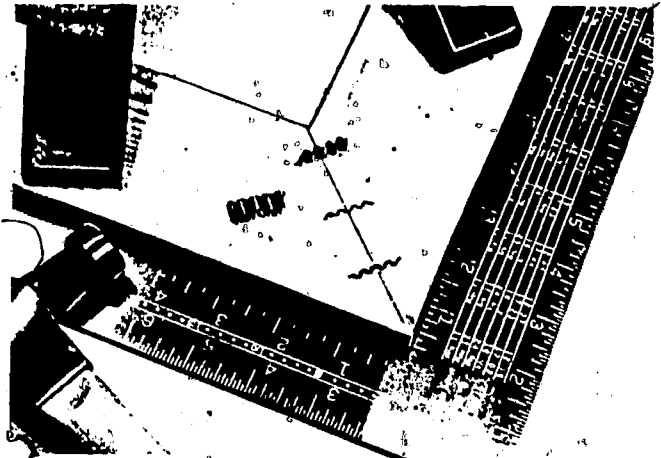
Using corrugated fasteners to hold miter joint.
